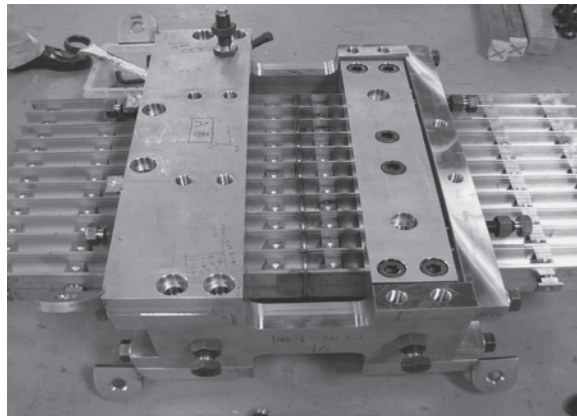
Small-scale trial RP laser welding tool.
